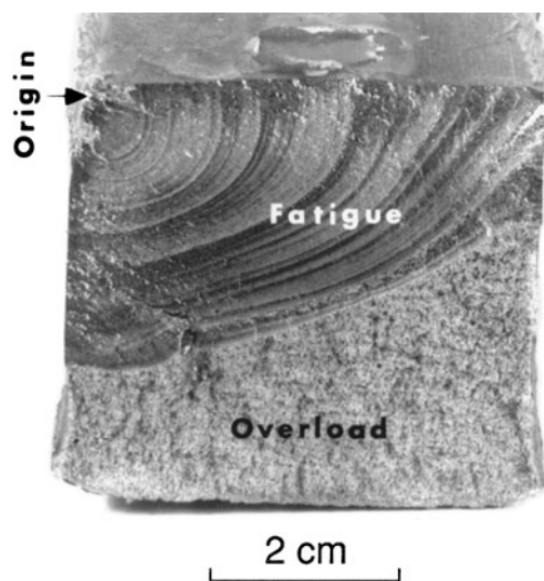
Beach marks on a brittle steel fracture surface [42].
